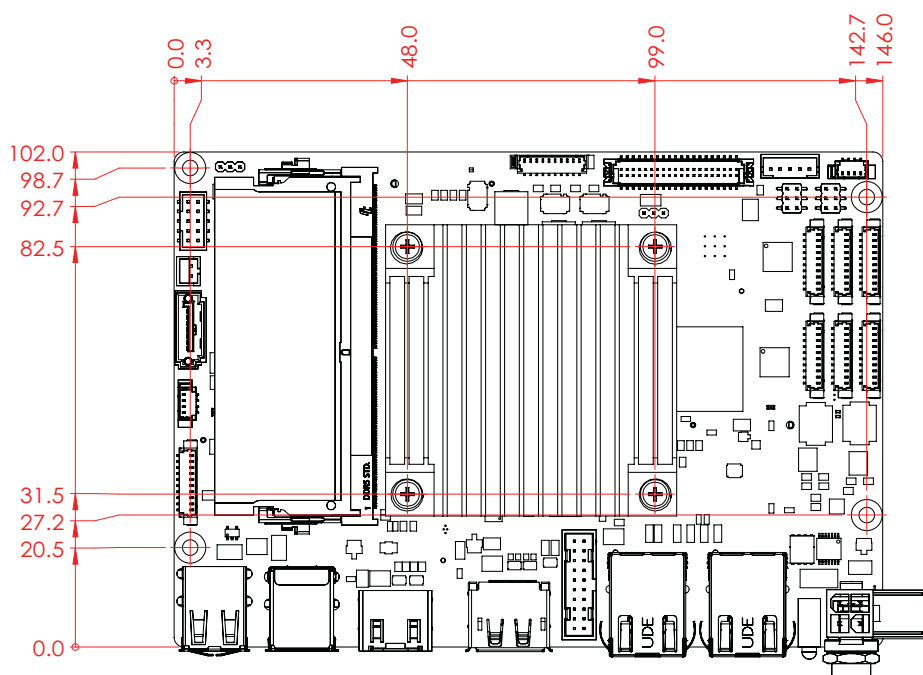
MIO-5154 Mechanical Drawing with CPU Heatsink (Top Side)
